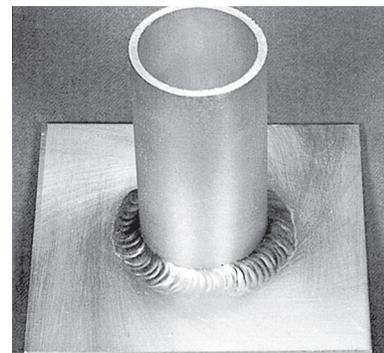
An aluminum weld made using the TIG process. The welding of aluminum is no longer a problem and can be done with the same ease as that of steel.
